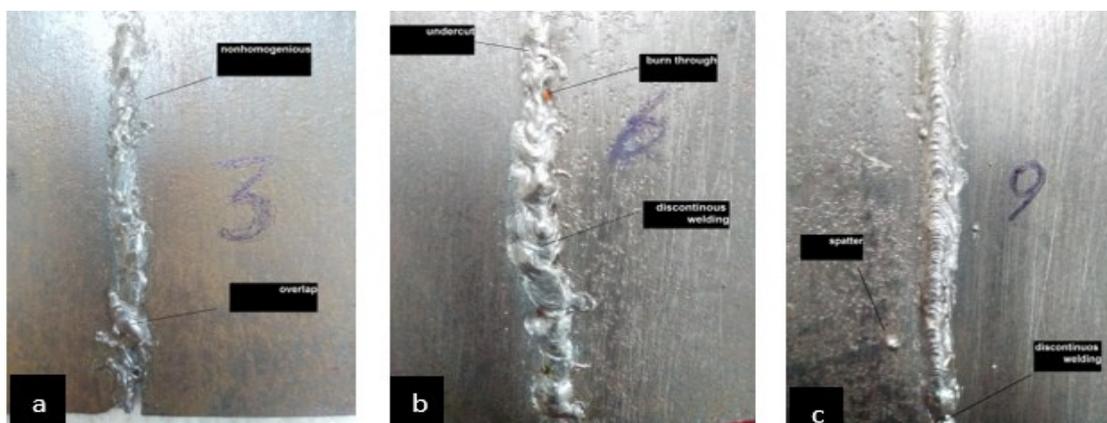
Welding defects at (a) A=250, S=123 (b) A=255, S=123 (c) A=260, S=123.
